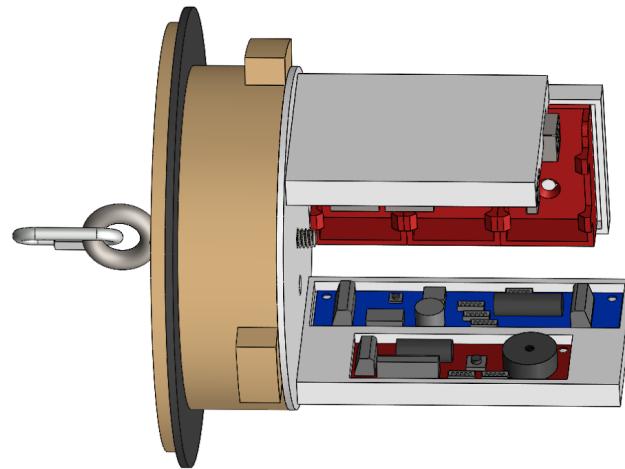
Fully Assembled Avionics Sled with Inner Ring
